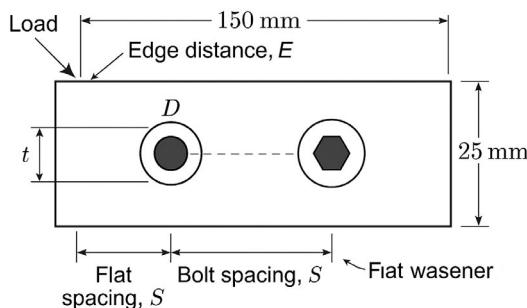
Schematic of the bolted joint configuration used for tensile testing.
